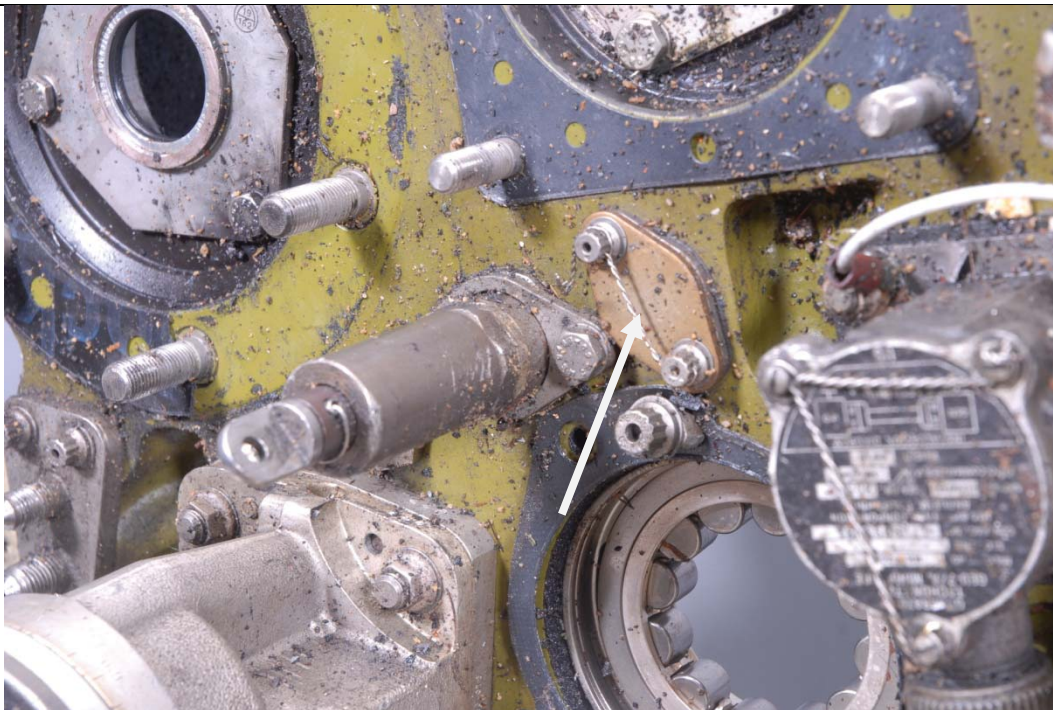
P-79297C, Gearcase Oil-Scavenge Pump
